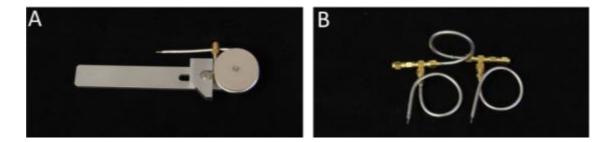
A: Semi-rigid bending tool (R282.102.000, Radiall). B: Bent and assembled $\lambda/4$ stubs (1x middle stub, 2x branch stubs).
